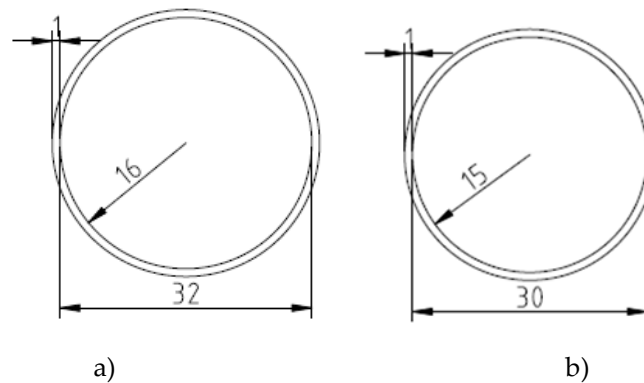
Dimensions of specimens [mm]: a) hand layup, b) prepreg. The length of all specimens is equal to 50 mm.
